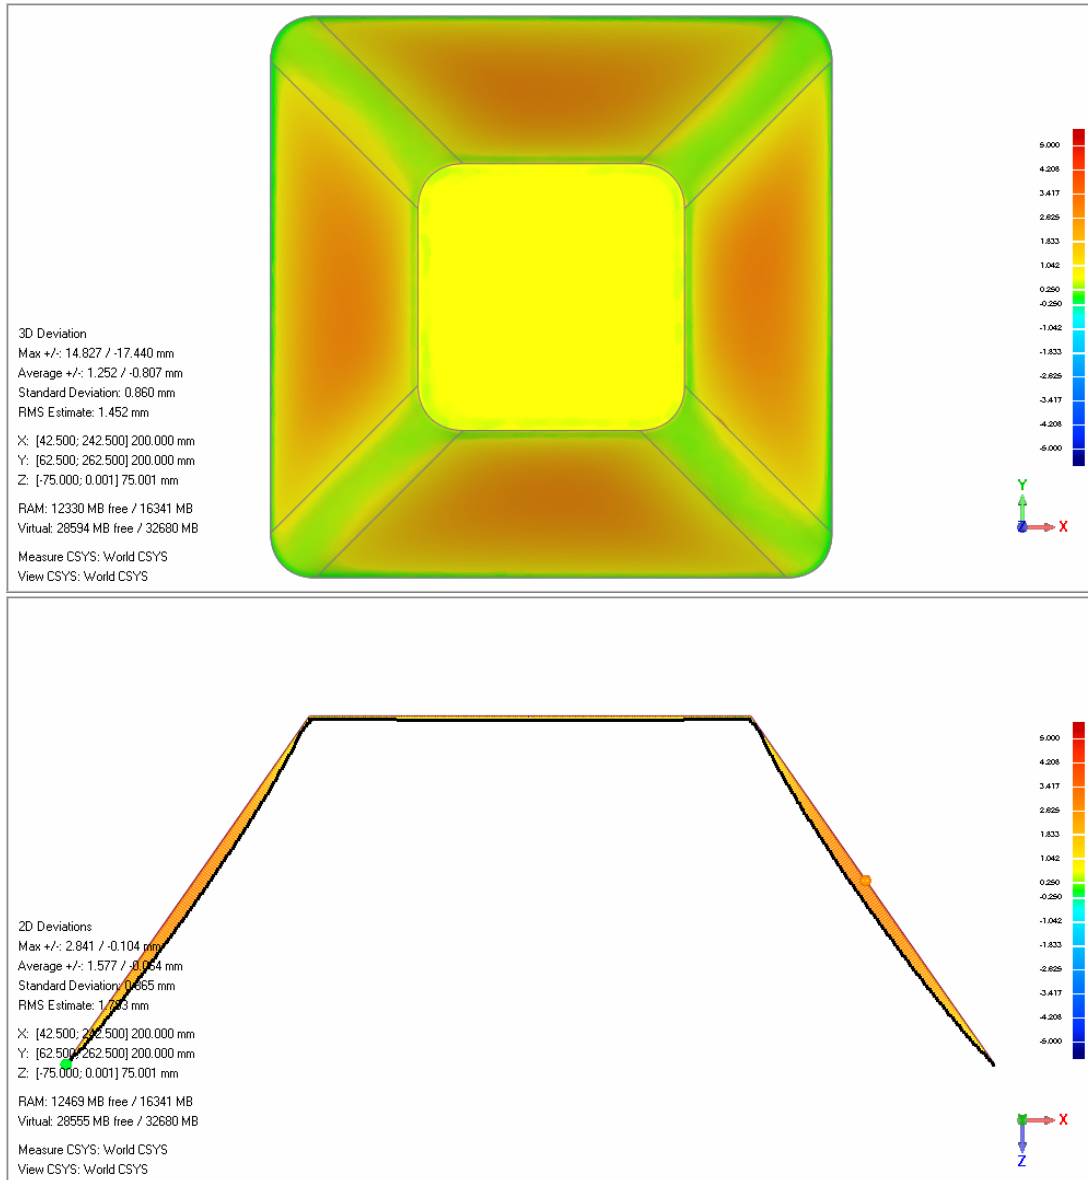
Part T3A geometric accuracy results - top view and cross-section view
